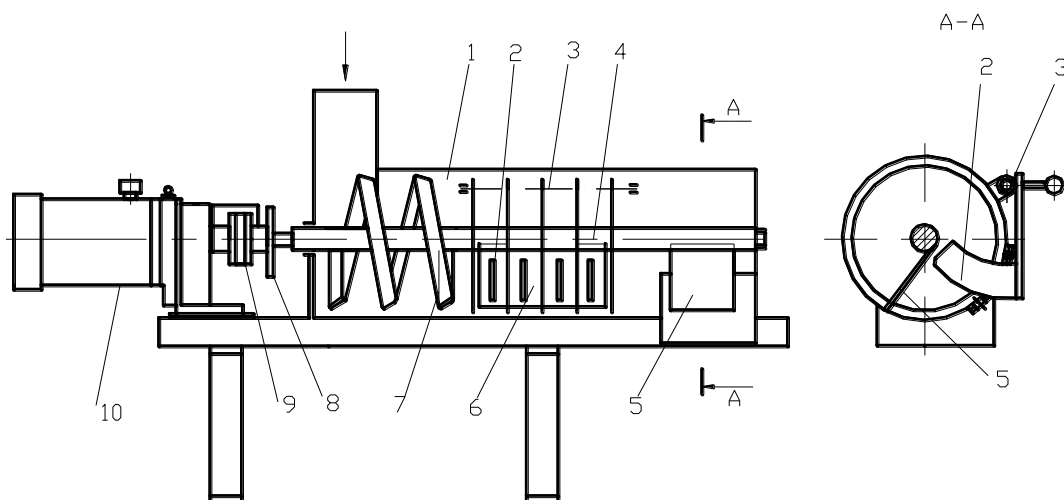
General view of the experimental kneading machine A2-KTT: 1 – kneading chamber; 2 – brake blades; 3 – hinge; 4 – shaft; 5 – scraper; 6 – plasticising discs; 7 – kneading blade; 8 – eccentric; 9 – connector; 10 – gear motor
